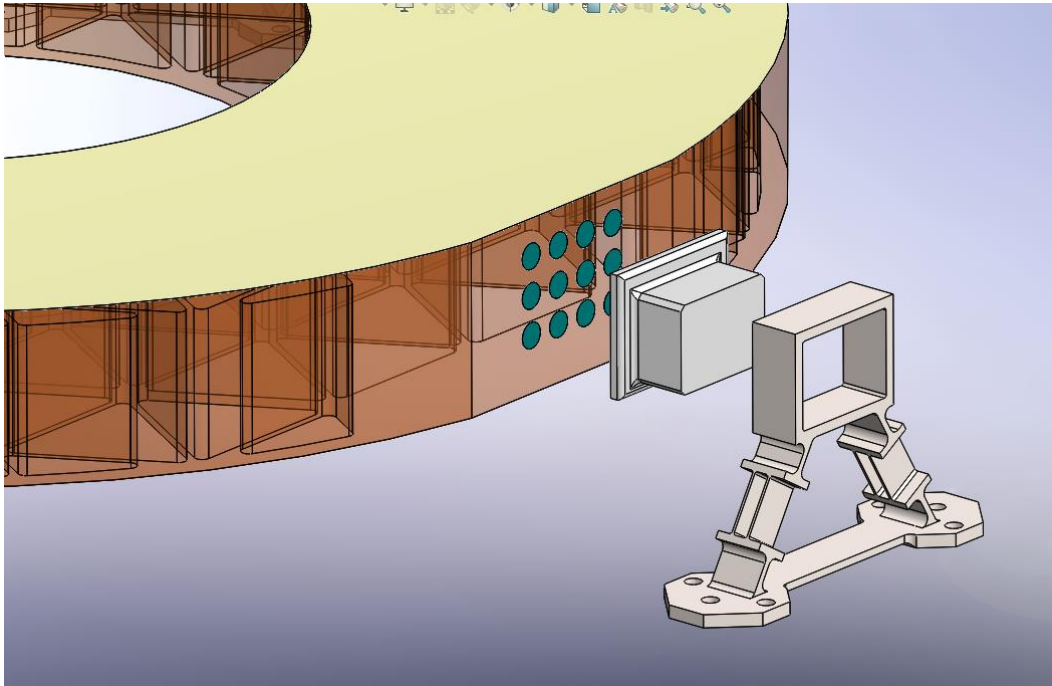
Exploded view of Primary Mirror Assembly Mounting.
